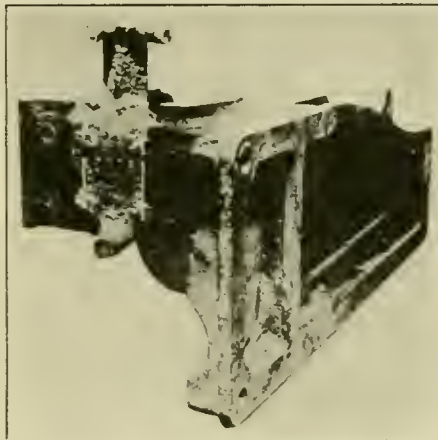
THERMIT WELDED FRAME BEFORE REMOVING RISER.
